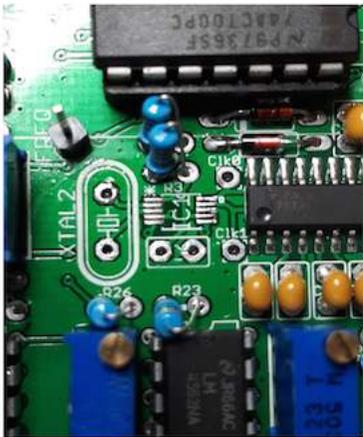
Clean the Removal Alloy from the board using fluxed solder wick.
